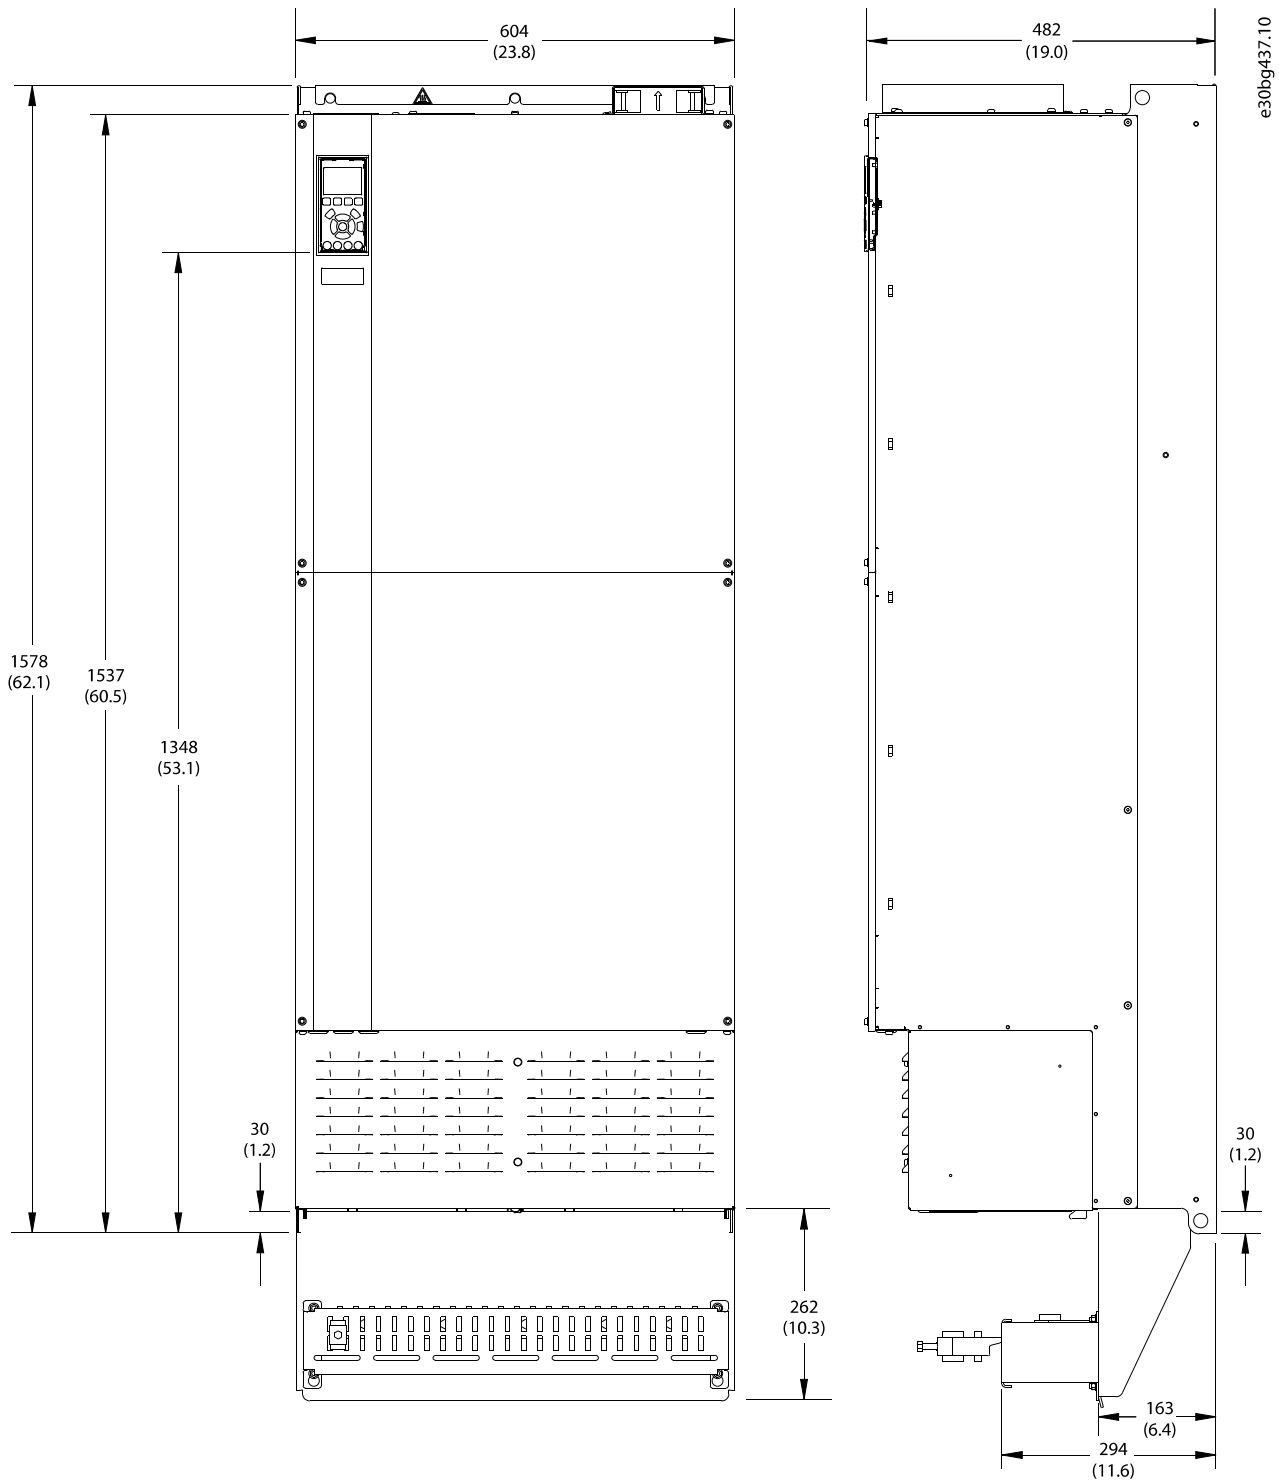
Front and Side Views of E4h with Cable Clamp Kit
